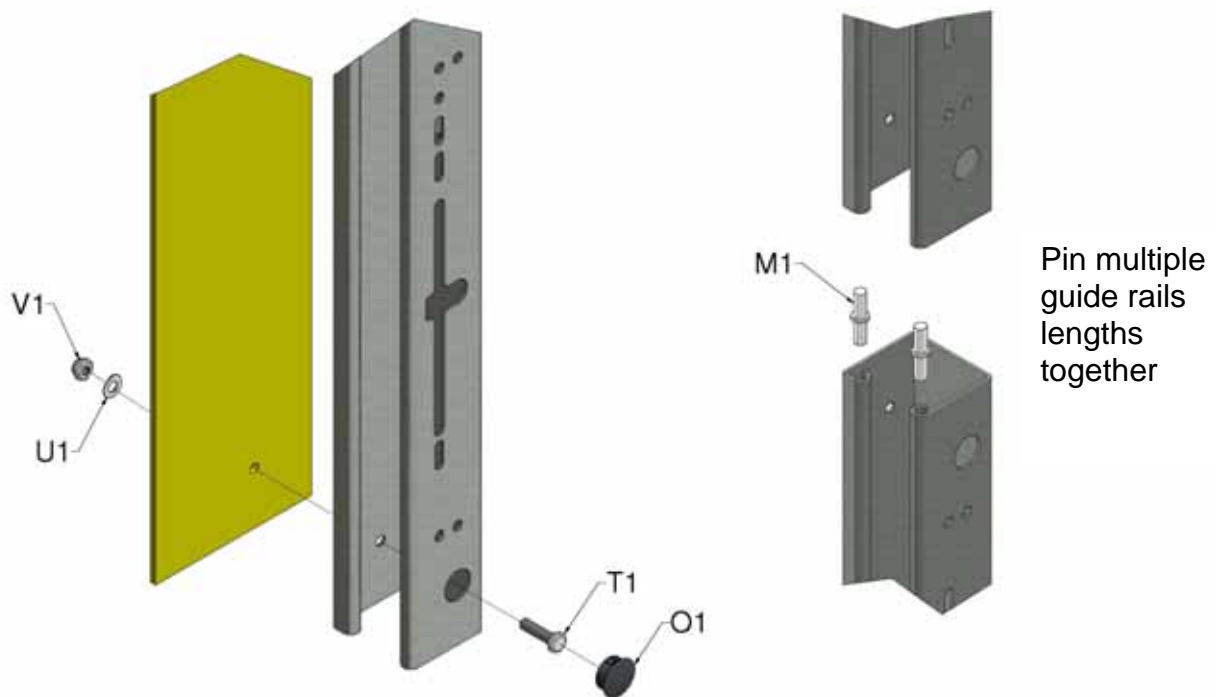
, Bolting of Guide Rail to Wall and Joining of Guide Rail.
